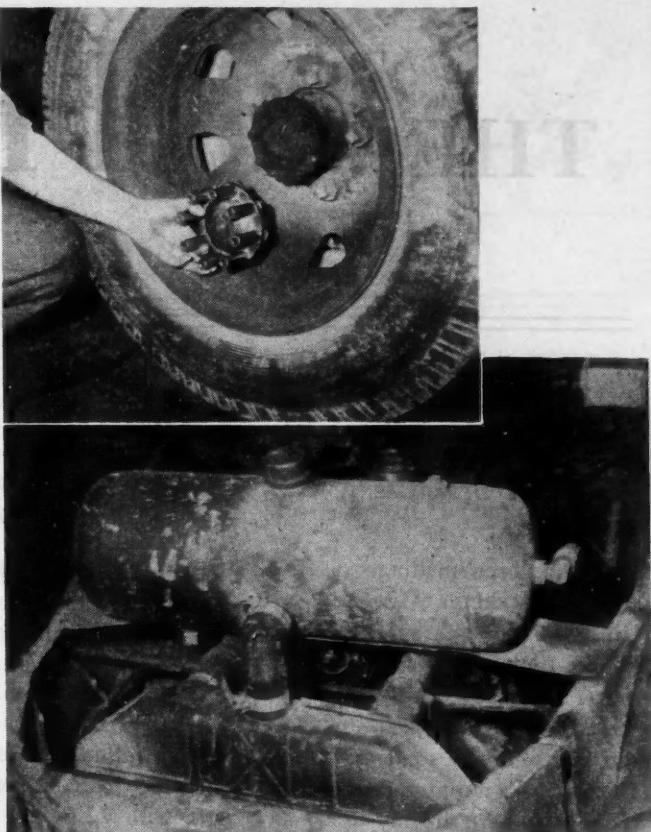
This shop-designed template is used in drilling out hubs for oversize studs. Jig is bolted to hub to position the 3-in. steel guides for the drilling operation
